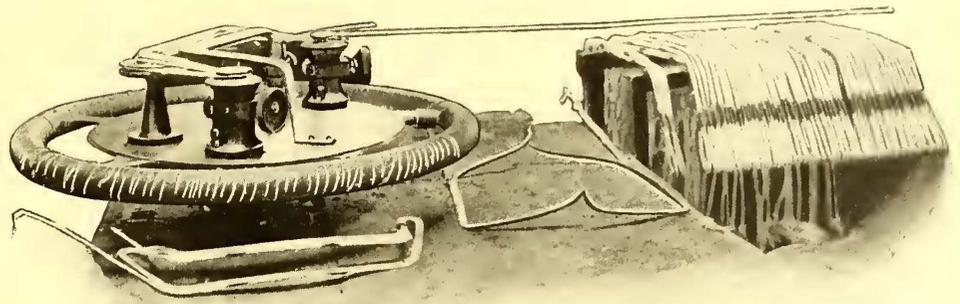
ARMATURE COIL WINDER FOR G. E. 800 MOTOR
